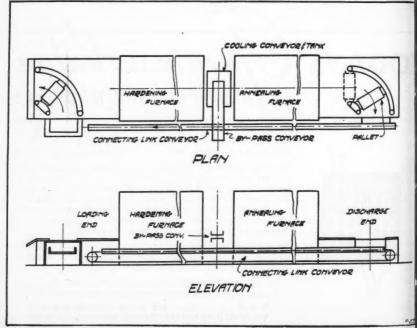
Diagram showing arrangement of conveyors for handling forgings continuously.
